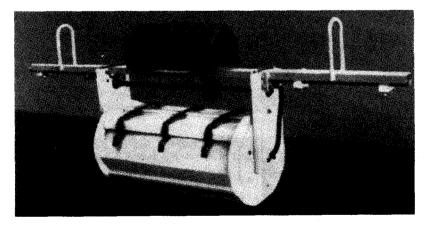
Barrel assembly equipped for use in a rack plating line.
